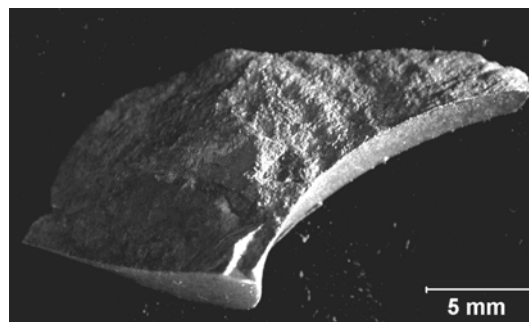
Macroscopic picture of the fracture surface (part X – Figure 5). Multi-plane fatigue fracture in the padding weld is marked with the rest lines
